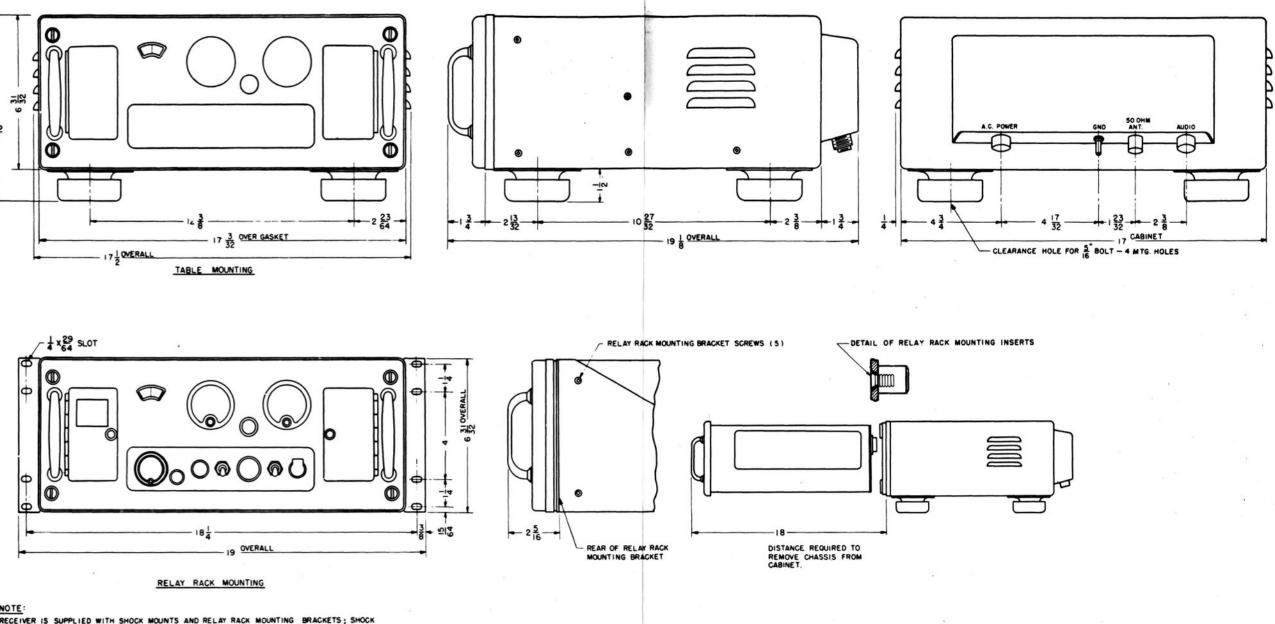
Relay-Rack Mounting Bracket, Outline Drawing
